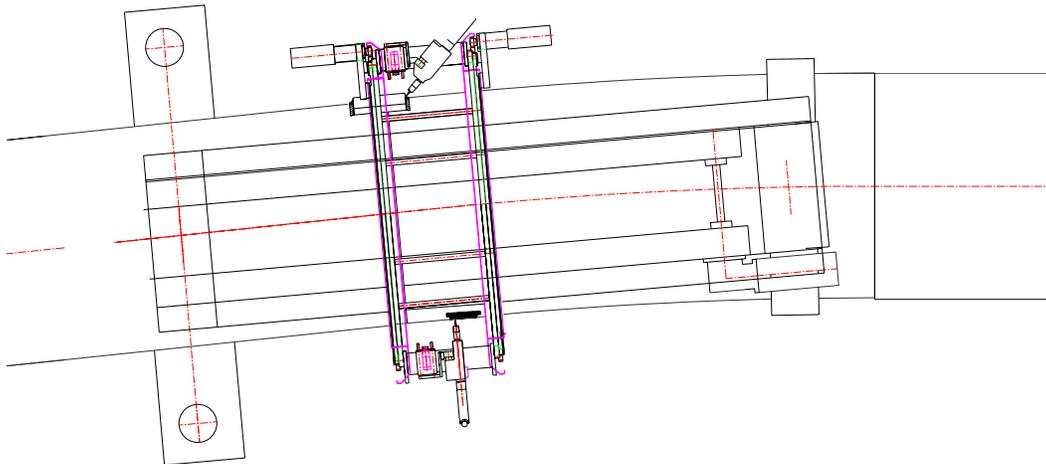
Overhead View of Type 6 Horizontal Bend Geometry Installation
